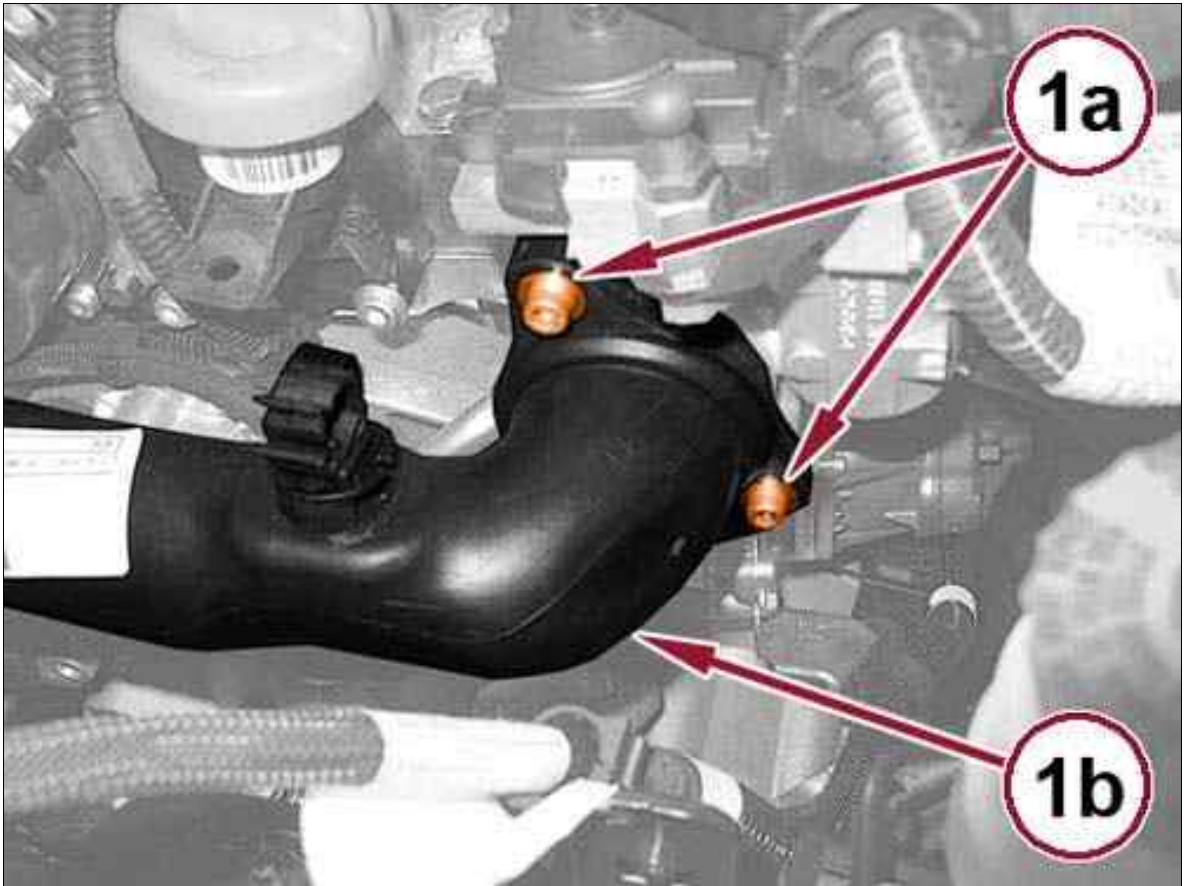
Thermostat Housing, Bolts, Hoses & Clamps
